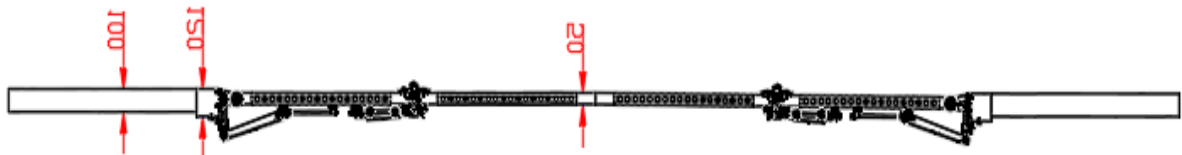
2D Design of a Bi-Folding Gate – Thickness Dimensions
